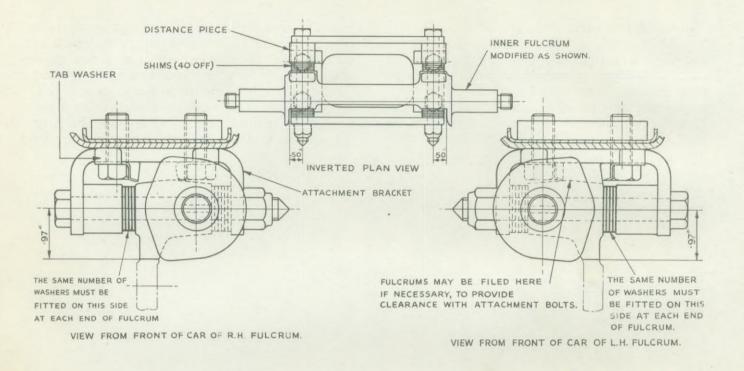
Modification to inner fulcrum attachment to facilitate wheel camber adjustment.
